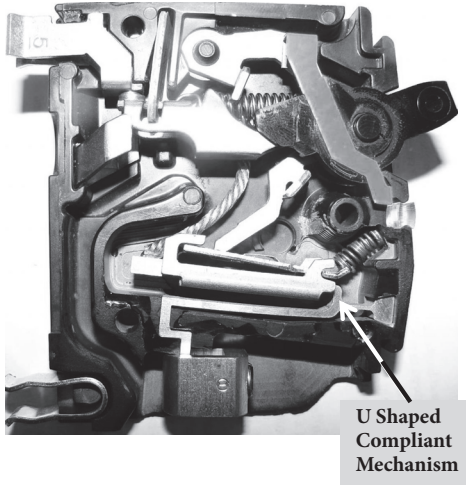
Internal view of prototype MCB, equipped with compliant mechanism that replaces bimetal strip.
